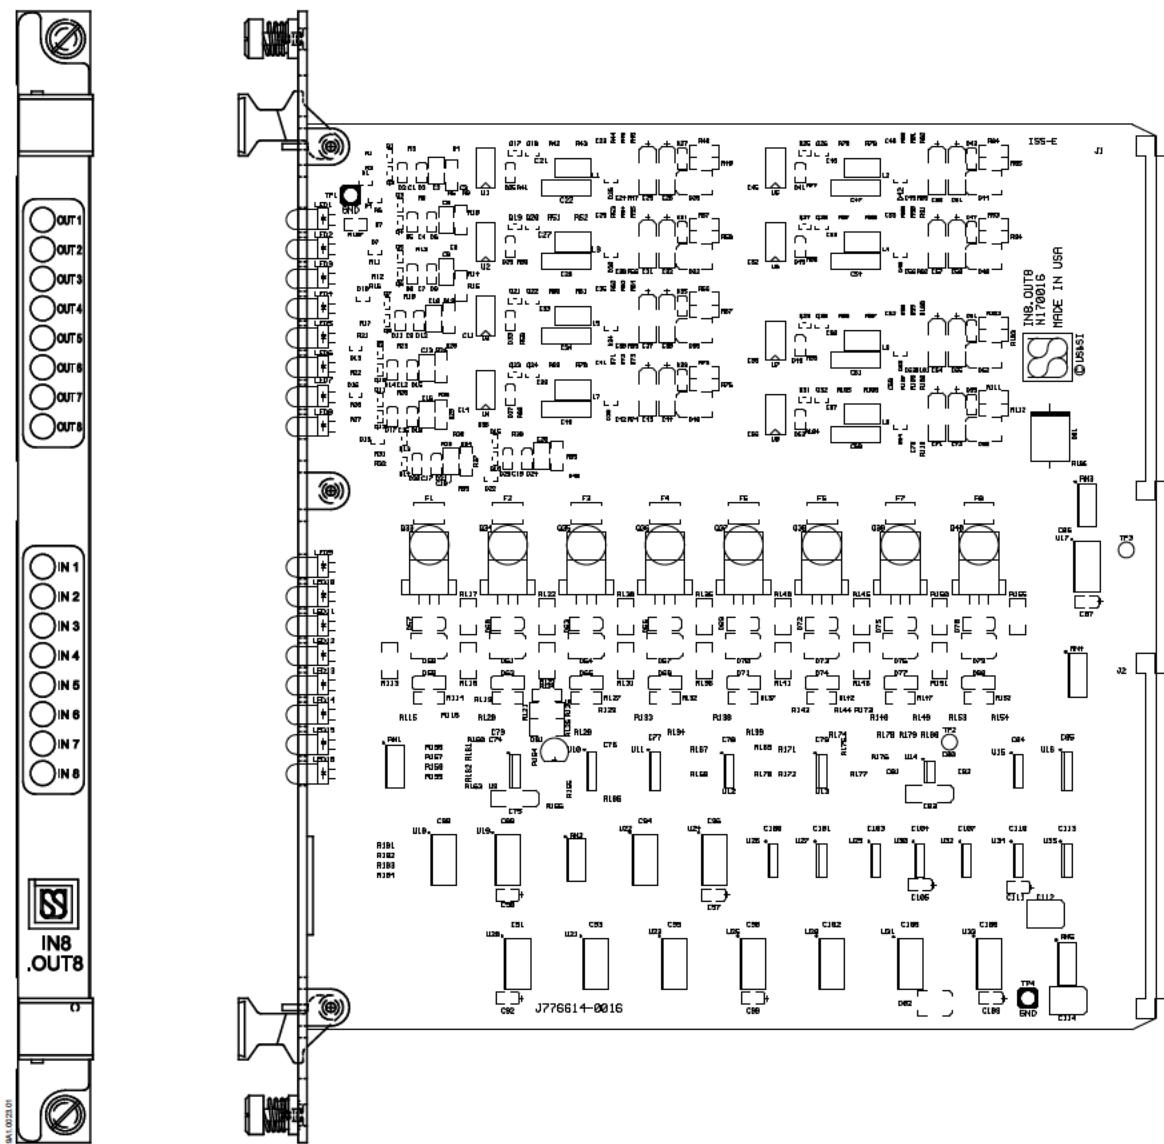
Mixed Vital Input / Output PCB Assembly
